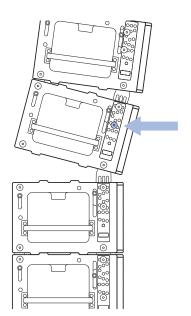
Remove Lock Pin of Bottom Suspended Cabinet
